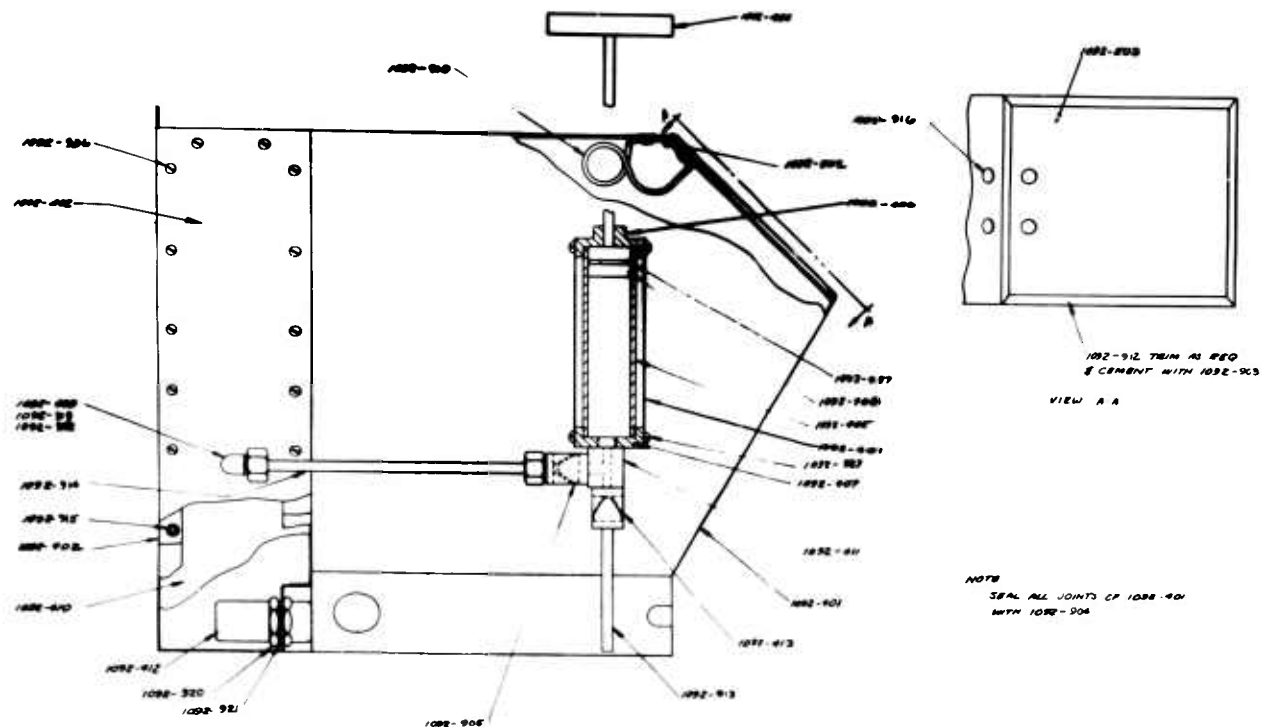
Vacuum Reservoir, Storage Container and Hand Pump Assembly
